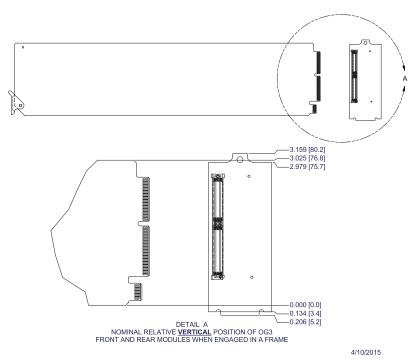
Physical Connection of an openGear Card to a Rear Module
